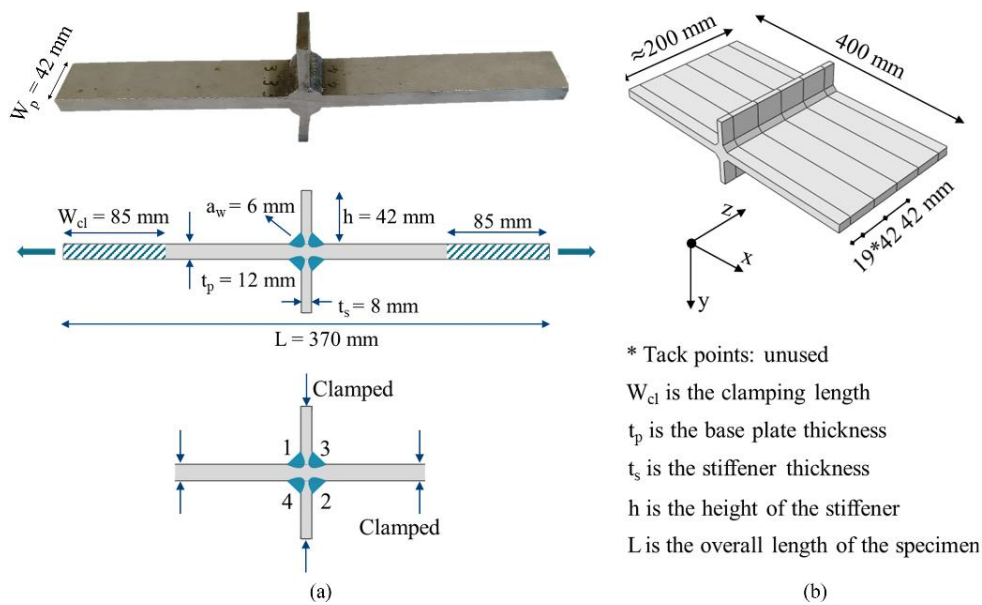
Specimen preparation [41]: (a) geometry and welding sequence of the studied cruciform joint; (b) cutting scheme.
